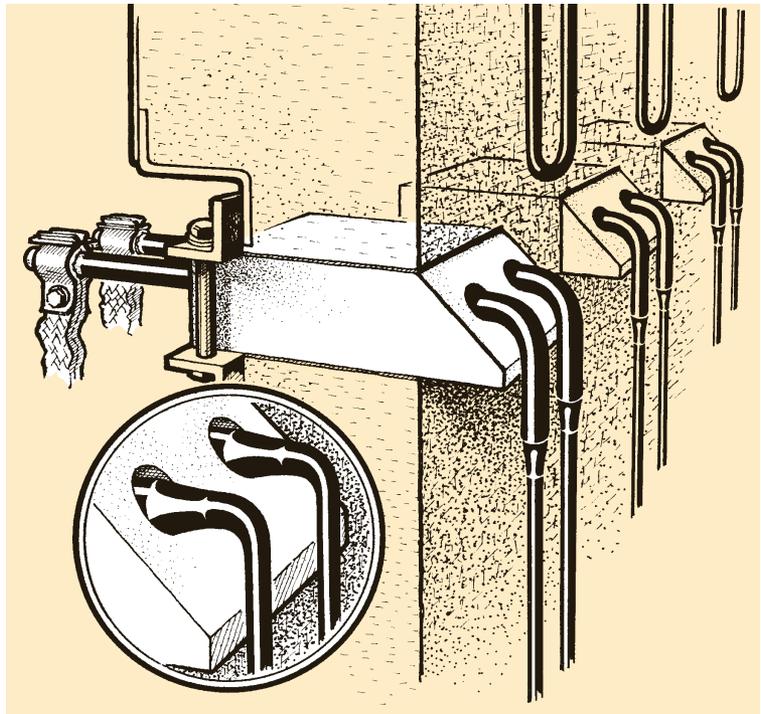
KANTHAL SUPER elements, with terminals bent 90°, installed through a furnace wall in a fibre lined furnace.
